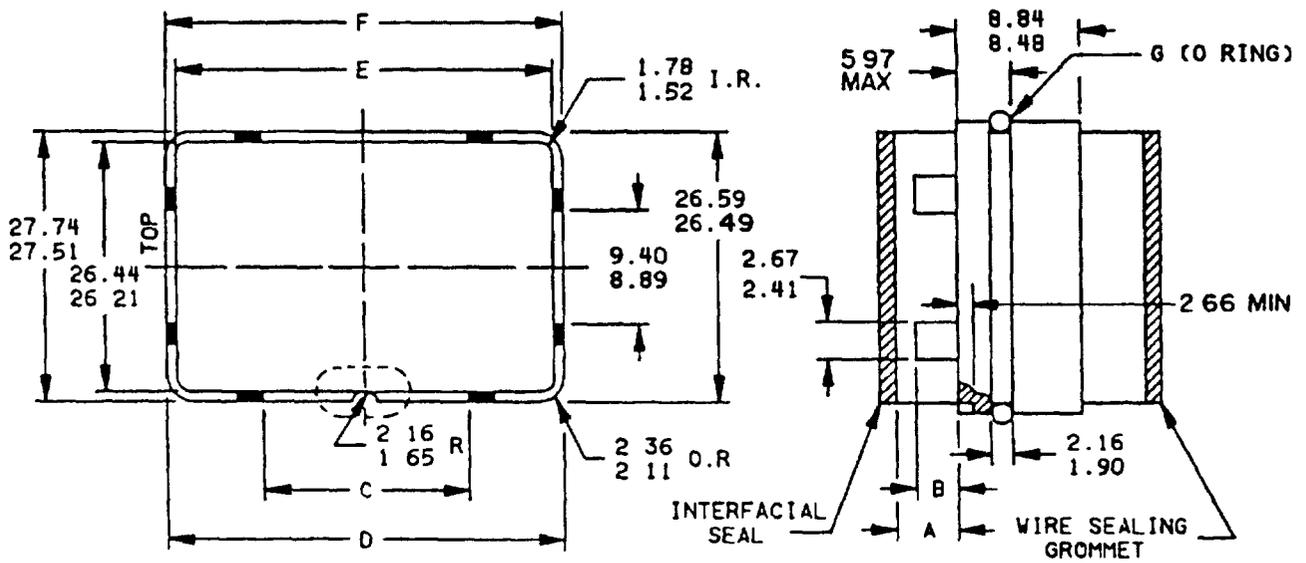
Insert interface dimensions for insert arrangements without size 22 contact cavities.
